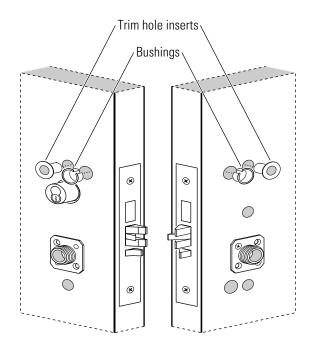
Removing the bushings and trim hole inserts (B.A.S.I.S. Lock shown)
